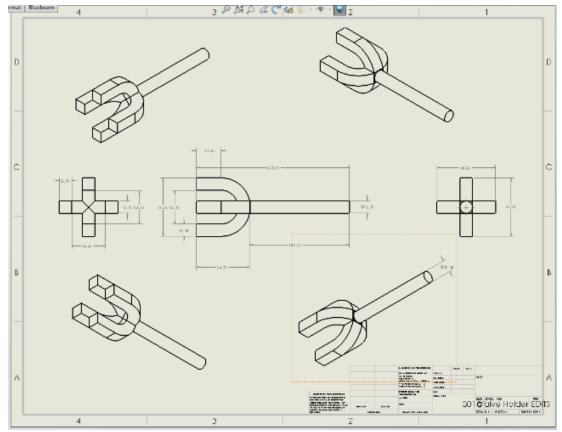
SOLIDWORKS Drawing of DC Motor Attachment with dimensions shown in mm
